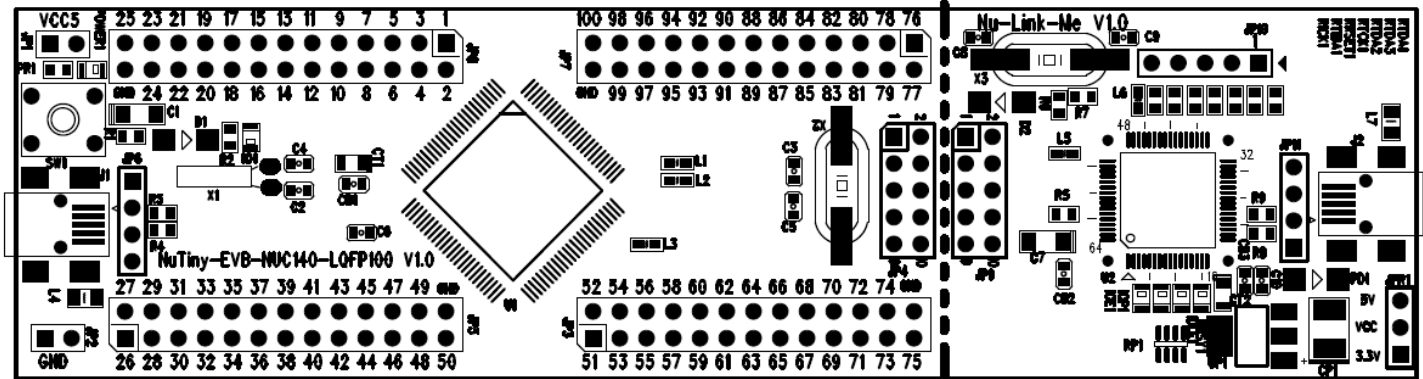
NuTiny-SDK-NUC140 PCB Placement
